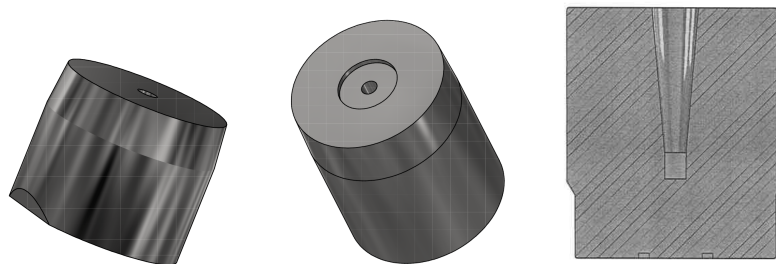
Drawings of special cases of crack at the bottom (left), second groove (center) and multiradius (right) detectors.
